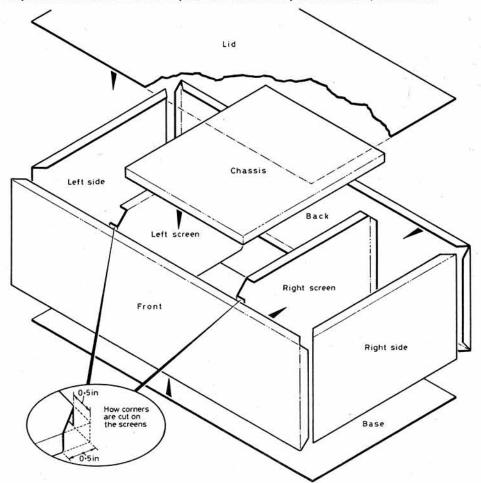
Component parts of the cabinet (made of 18swg aluminium). Base and lid: 15 by 6·875in. Front and back: 15 by 4·75in with 0·375in flanges. (Flanges have a 45° cut at each end.) Sides: 7 by 4·75in with 0·375in flanges on the longer sides. (Flanges have a 45° cut each end.) Screens: 6·937 by 4·75in with 0·375in flanges on each side. These are initially square-cornered chassis. The corners are then cut as shown in the inset. Chassis: 6·937 by 5in with a 0·375in flange on each side
